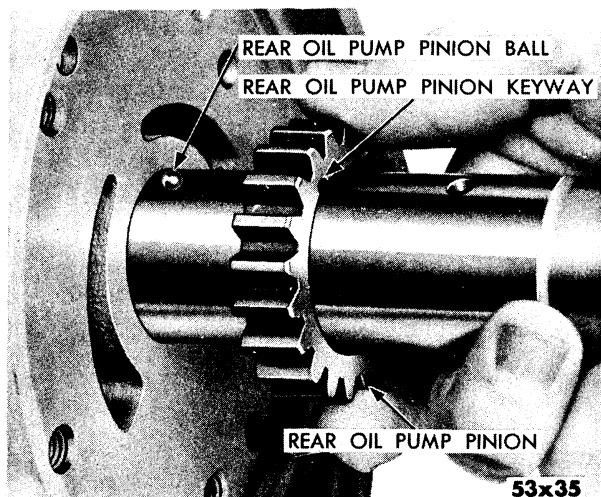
Removal and Installation of Rear Oil Pump Pinion
